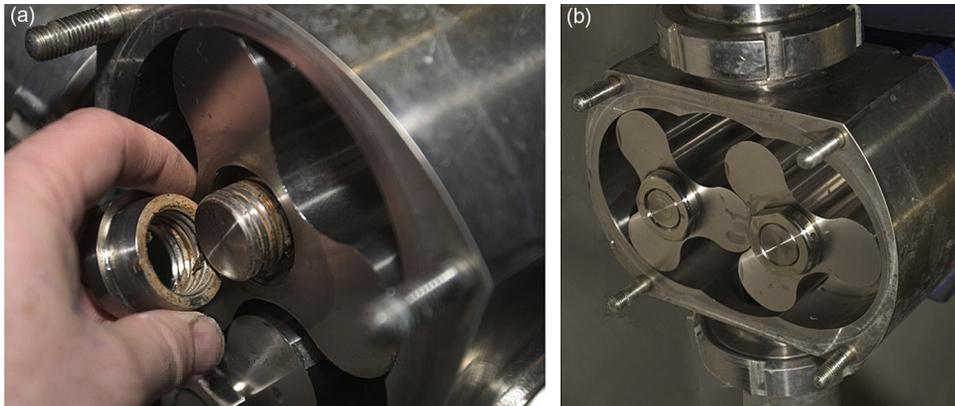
(a) Ingress and retention of product and/or microorganisms in the threads of the rotor retaining nuts should be avoided by making use of crevice-free domed retainer nuts and by application of O-rings. (b) In an improved version, the rotors and shaft should be designed as an integral construction. With the ports arranged in the vertical plane, it is possible to drain the lobe pump casing. *Courtesy of Burggraaf & Partners, www.burggraaf.cc.
